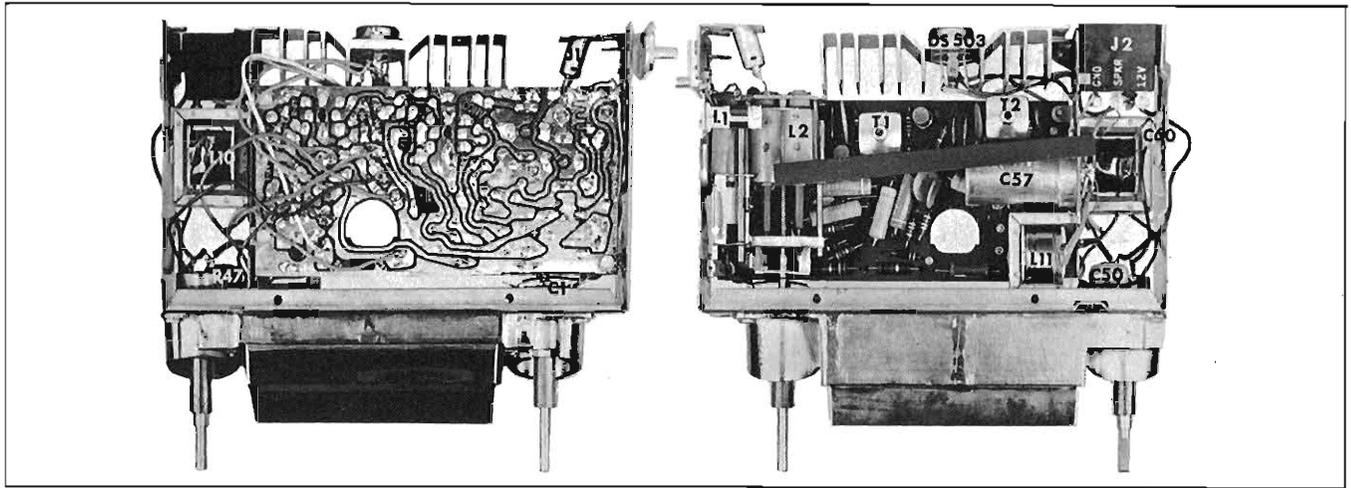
CHEVROLET PARTS LAYOUT CIRCUIT BOARD VIEW - 986096 RADIO
